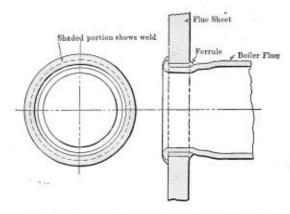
Welding of Tube in Back Flue Sheet
